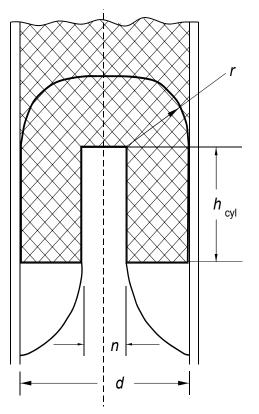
Cross section of a rocket motor with a cylindrical combustion cavity.
